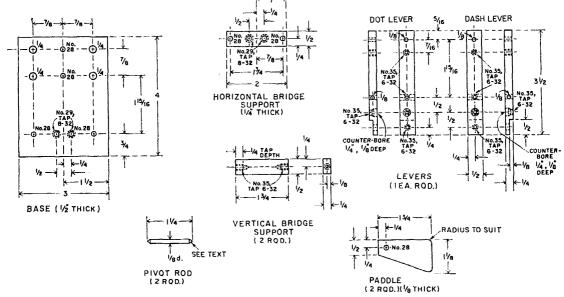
Sketch showing details and dimensions of components required for the Nikey.
